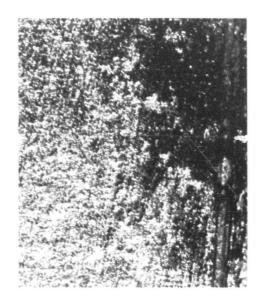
Area Adjacent to Weld Made in Figure A22
